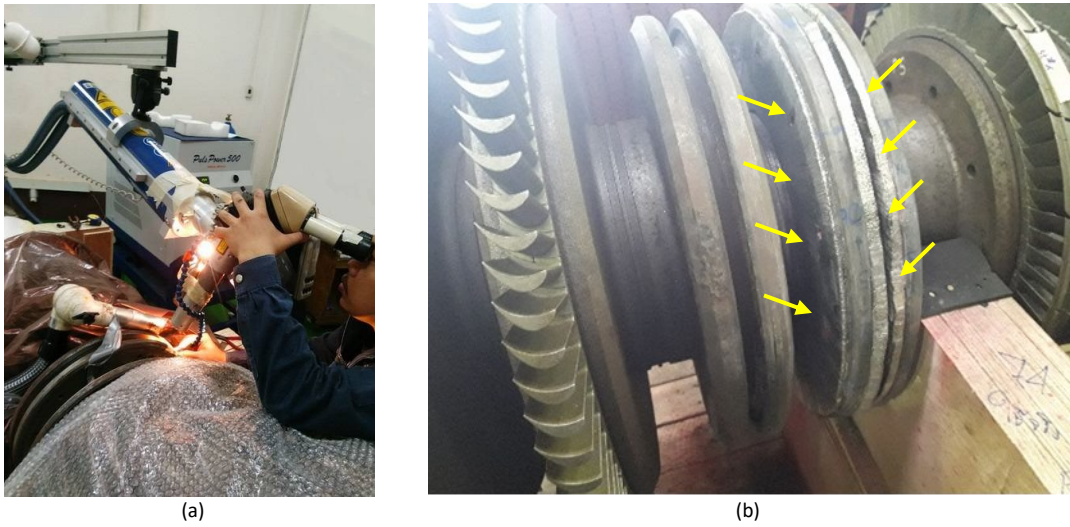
(a) Laser welding performed on the damaged areas of the rotor disk; (b) As welded surfaces after laser welding
